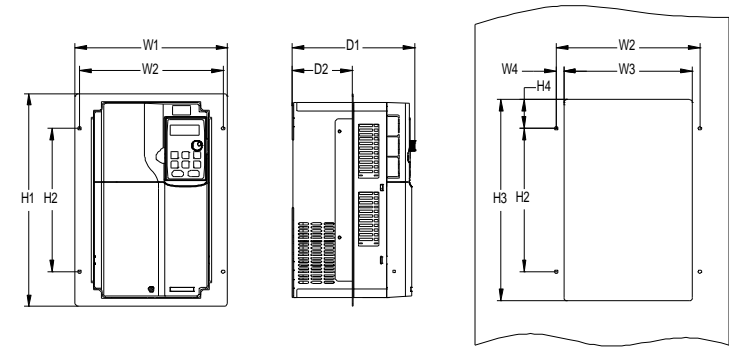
Flange mounting for VFDs in T5–T7 frames
